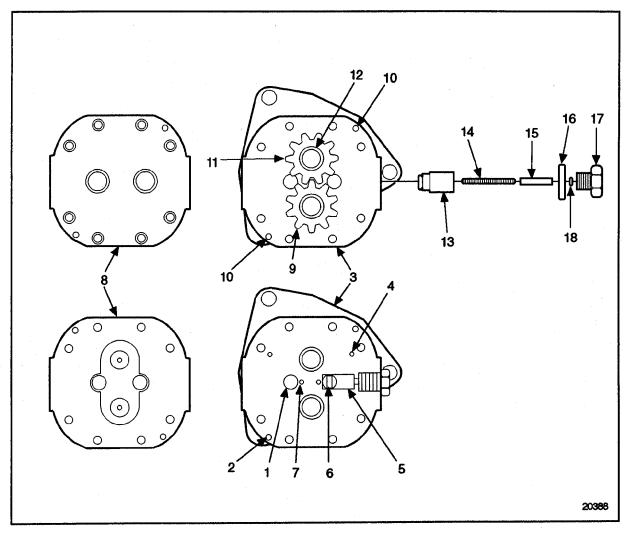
Gear Case and Air Compressor-Mounted Fuel Pumps
